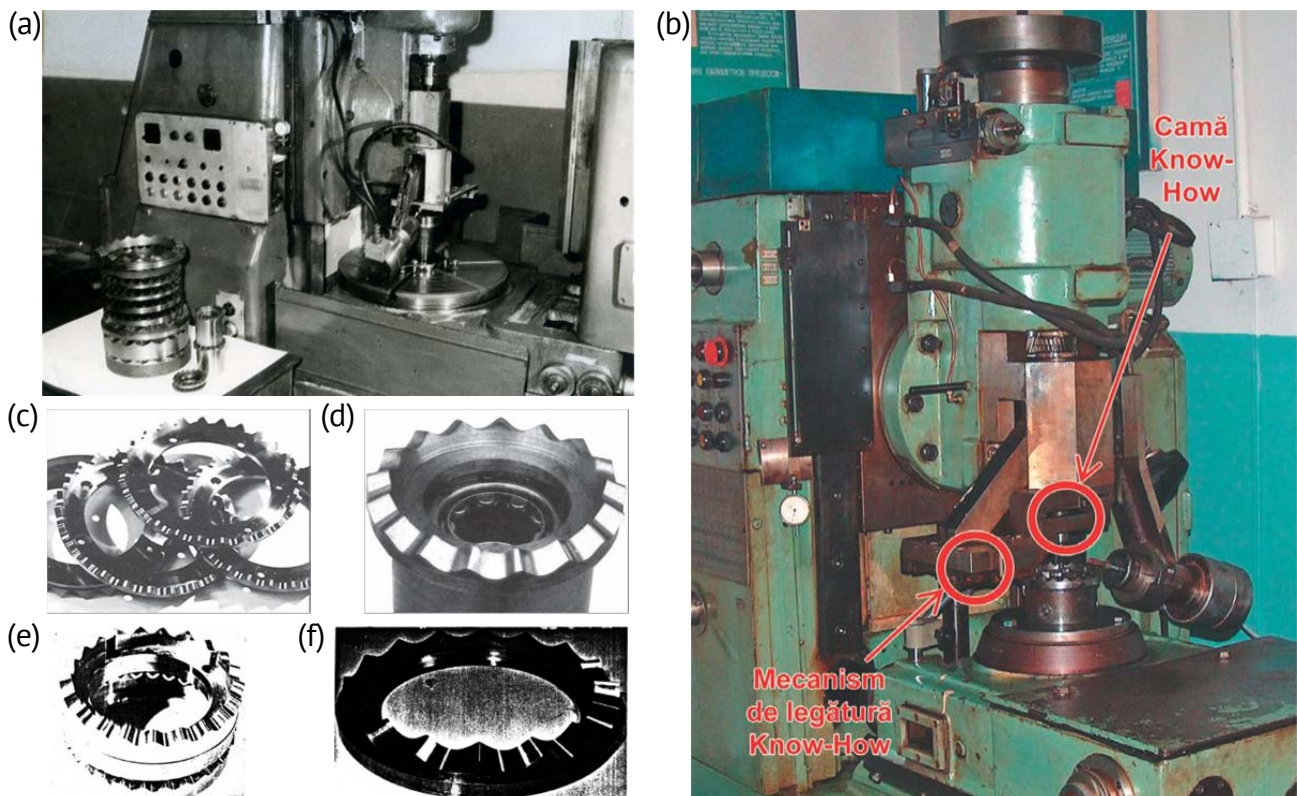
Machine-tool with teeth generation device with the tool in the shape of a truncated cone for generating the gear teeth by milling (a), rectification (b) and samples of manufactured toothed wheels by rectification for transmissions with reducer (c), (d), (e) and multiplier (f) regime.
